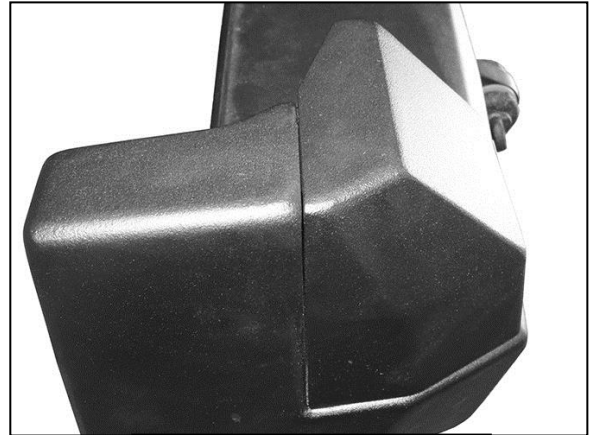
Attach driver/left Bumper End Cover to top of Bumper
